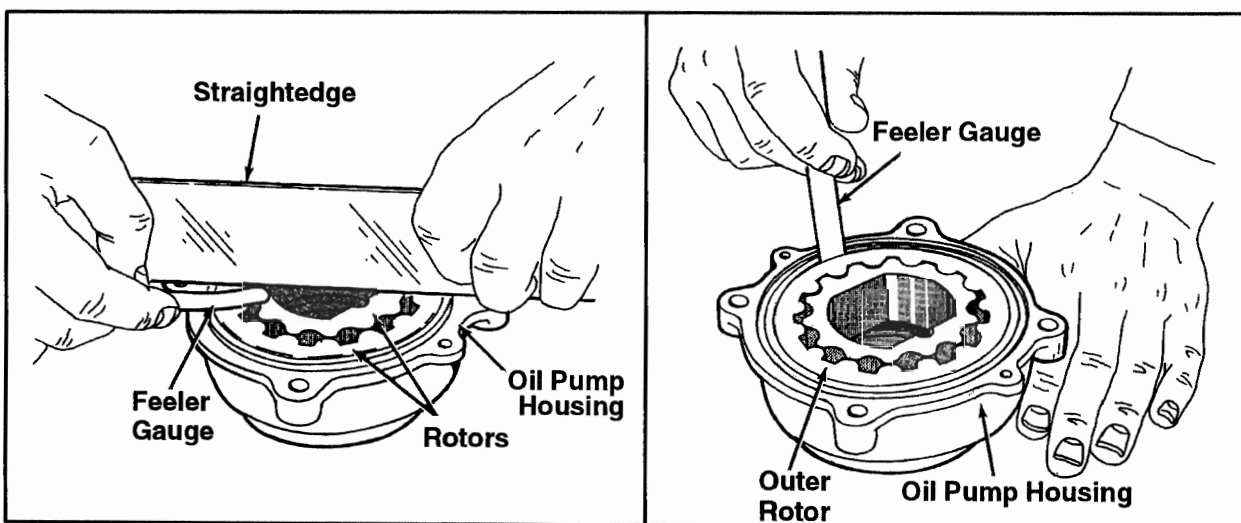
Lube Oil Pump Inspection and Measurement
